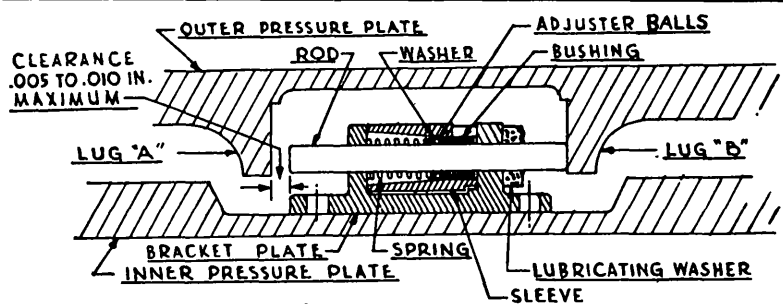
Cross section of automatic brake adjuster with brake applied. Chrysler disc brake
